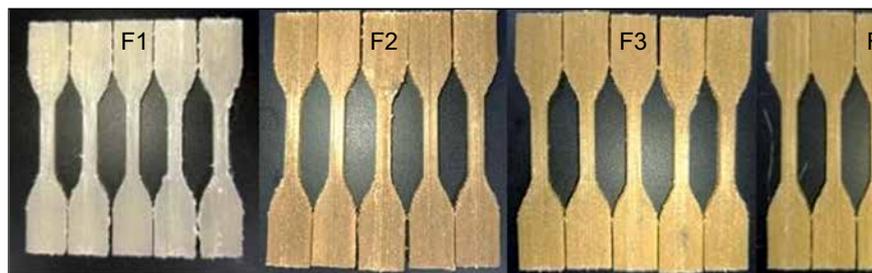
Test specimens obtained via 3D printing after performing a tensile test.
